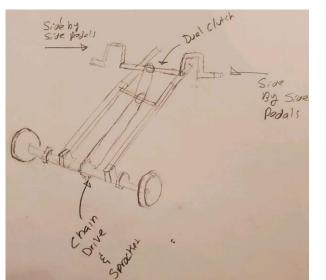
Chain drive and solid rear axle with dual caliper brake system.
